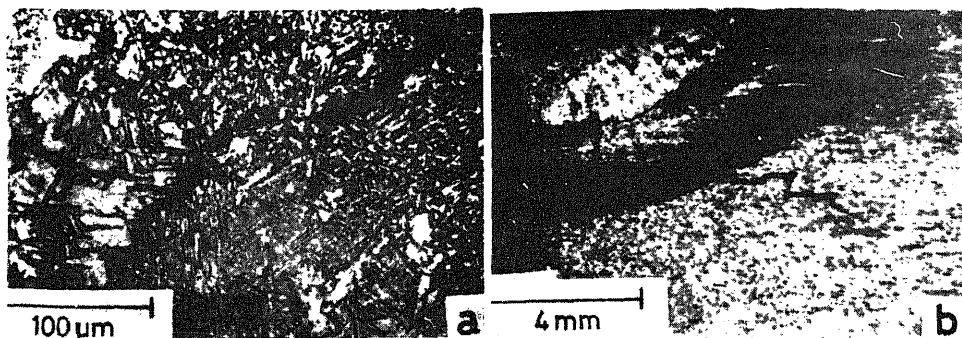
(a) Hot tear across HAZ and weld metal and (b) lamellar tearing in T-butt weld.
